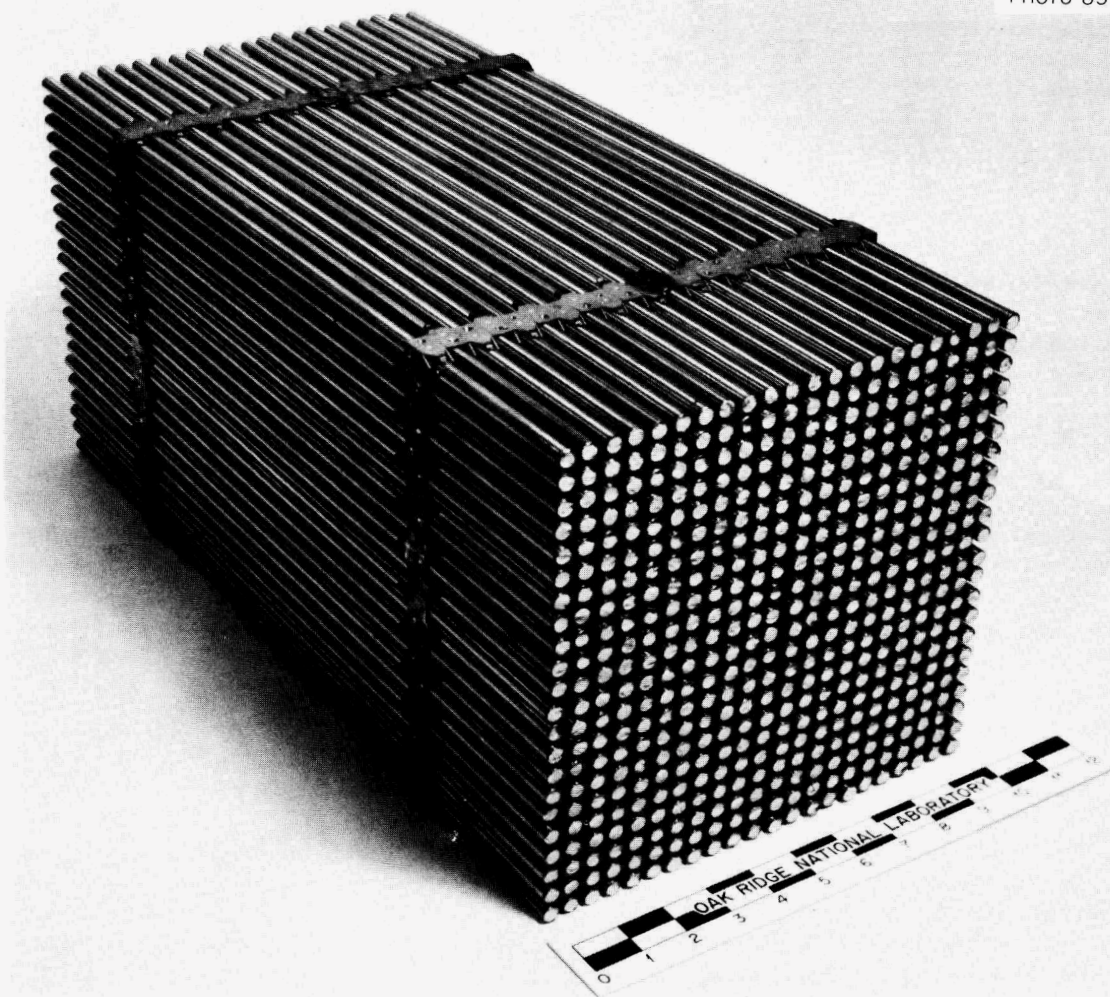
Prototype Fuel Assembly Consisting of 484 (22 by 22 Array) Porcelain-Filled 0.340-in.-diam by 21-in.-long Stainless Steel Tubes. Leaf-spring grids were fabricated by welding together sections of Consolidated Edison core B grids.
